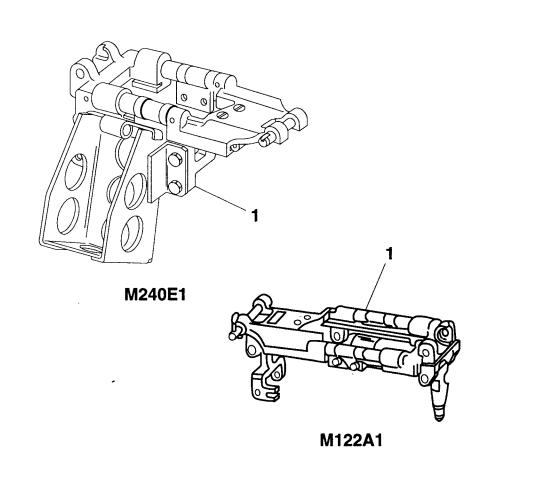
M240E1 Flexible Mount Assembly, 12597090; Flexible Mount Assembly, 12976940 (Assembled View)
